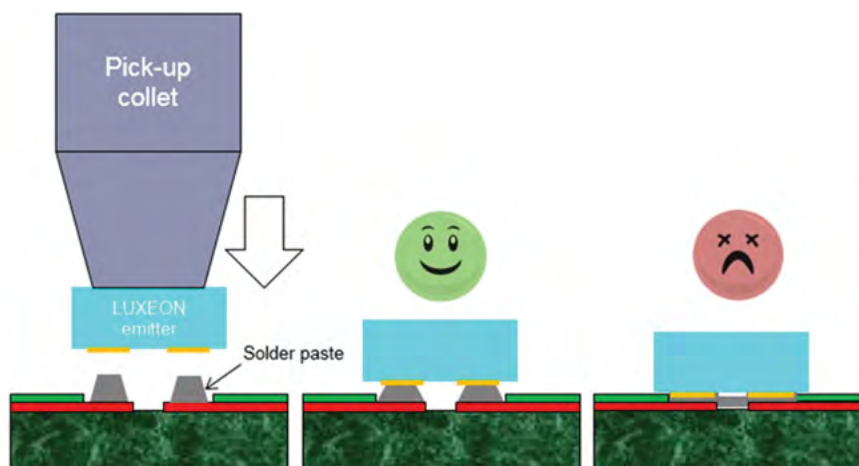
A proper starting point for the mounting z-height of LUXEON HL4Z is 1/3rd of the stencil thickness with reference to the top of the stencil paste, i.e. the collet should be in an under-travel position. Center picture shows the optimum result for the collet height setting. Right picture shows over-travel position and may result in bridging of the solder paste on adjacent pads prior to reflow, increasing the likelihood of electrical shorts.
